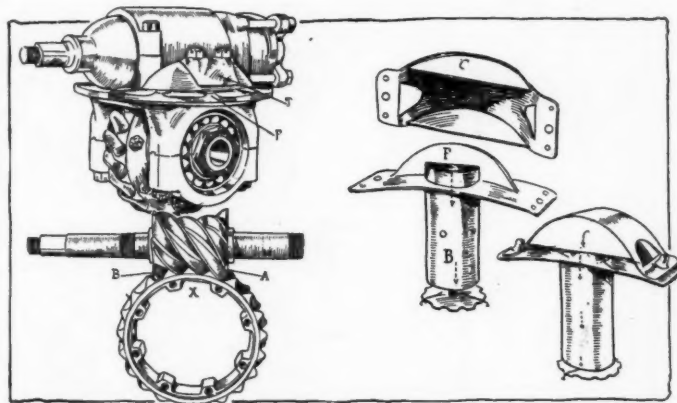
Benson drive. Fig. 3—Morrissey ventilator
